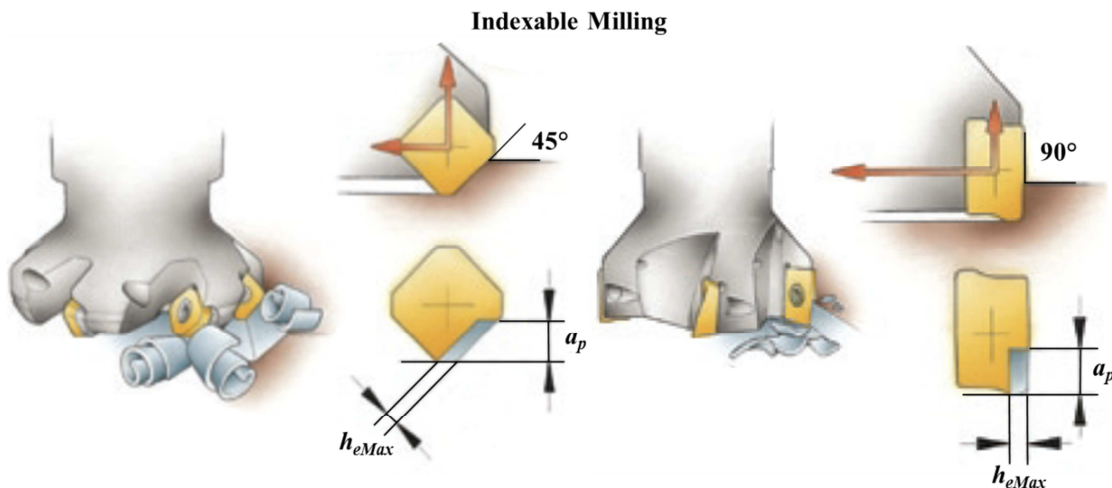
Cutter body entry angles, cutting force effects and axial immersion [47]
